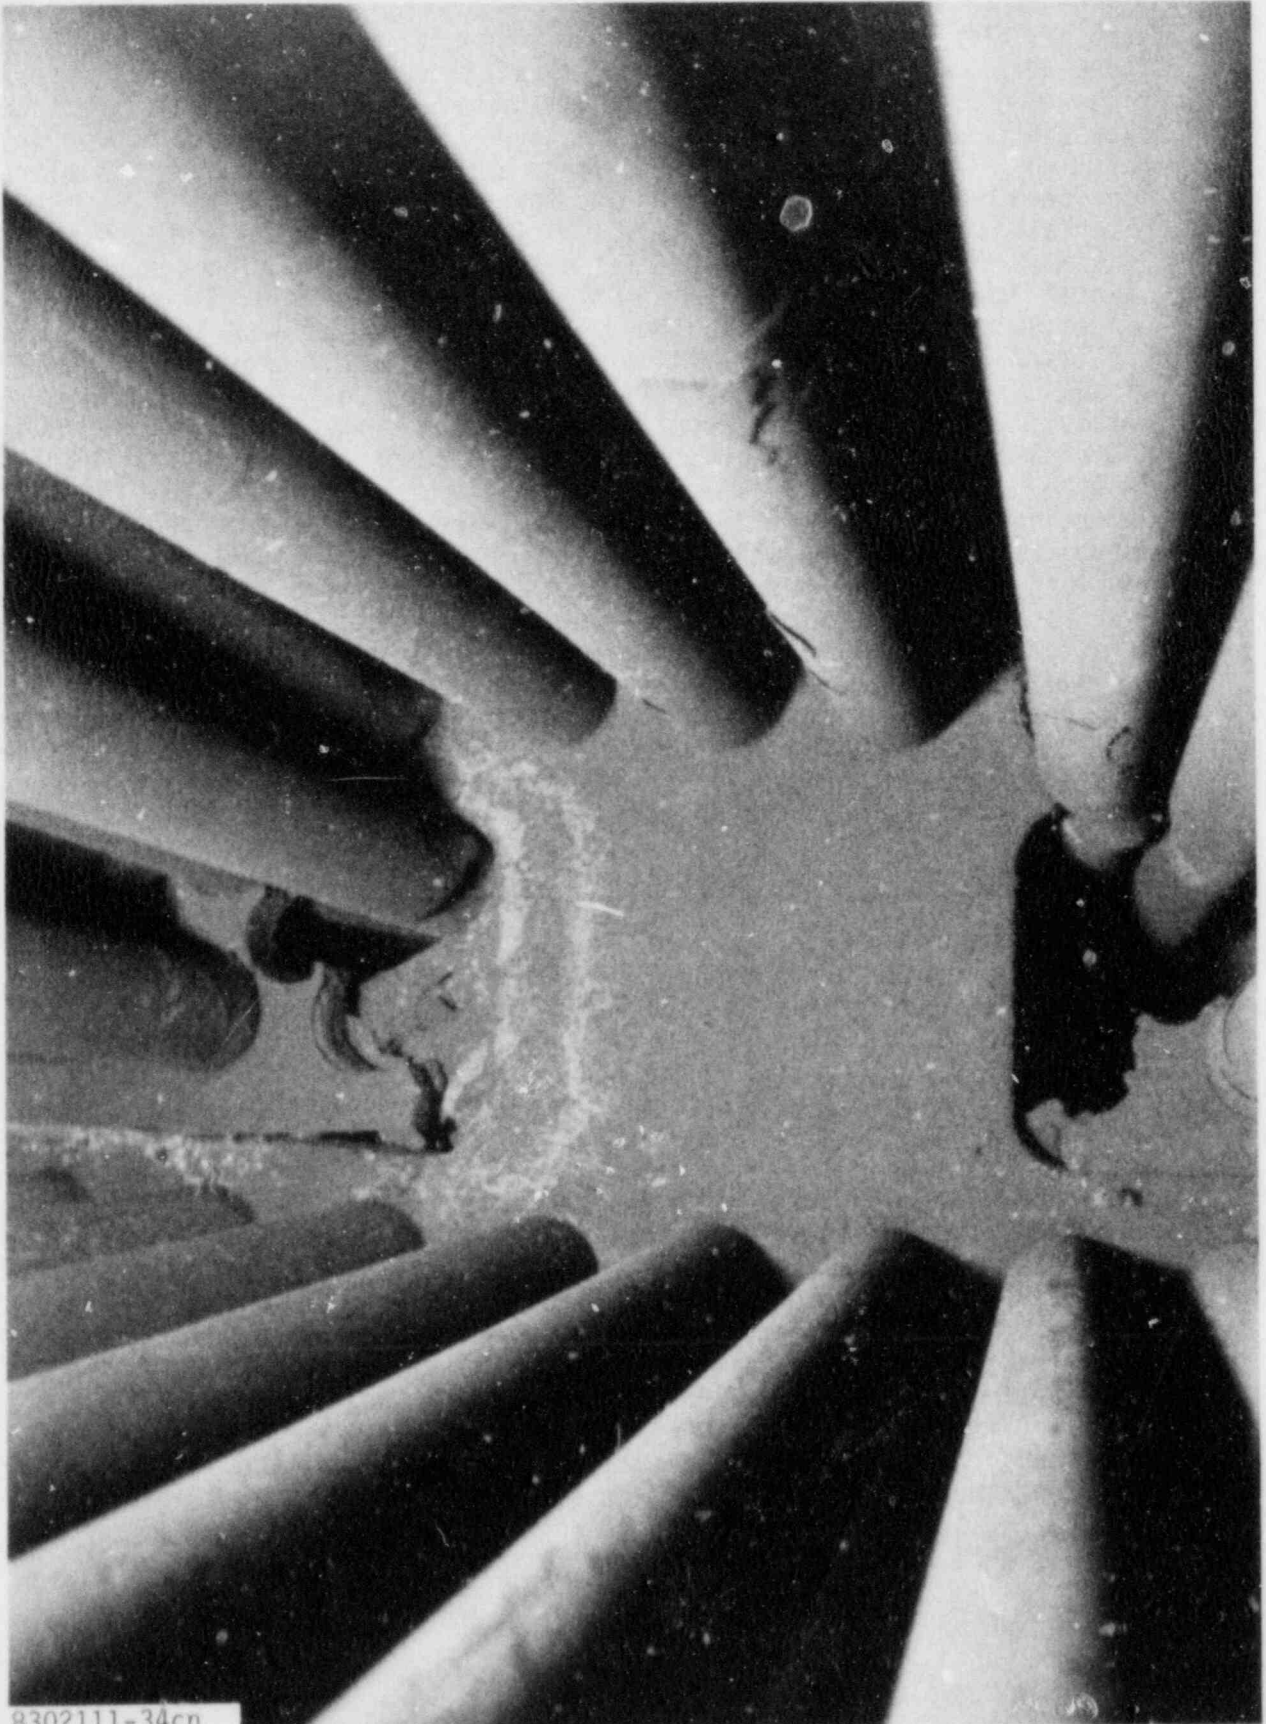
Bottom Side of First Support Plate, From 0° Handhole
